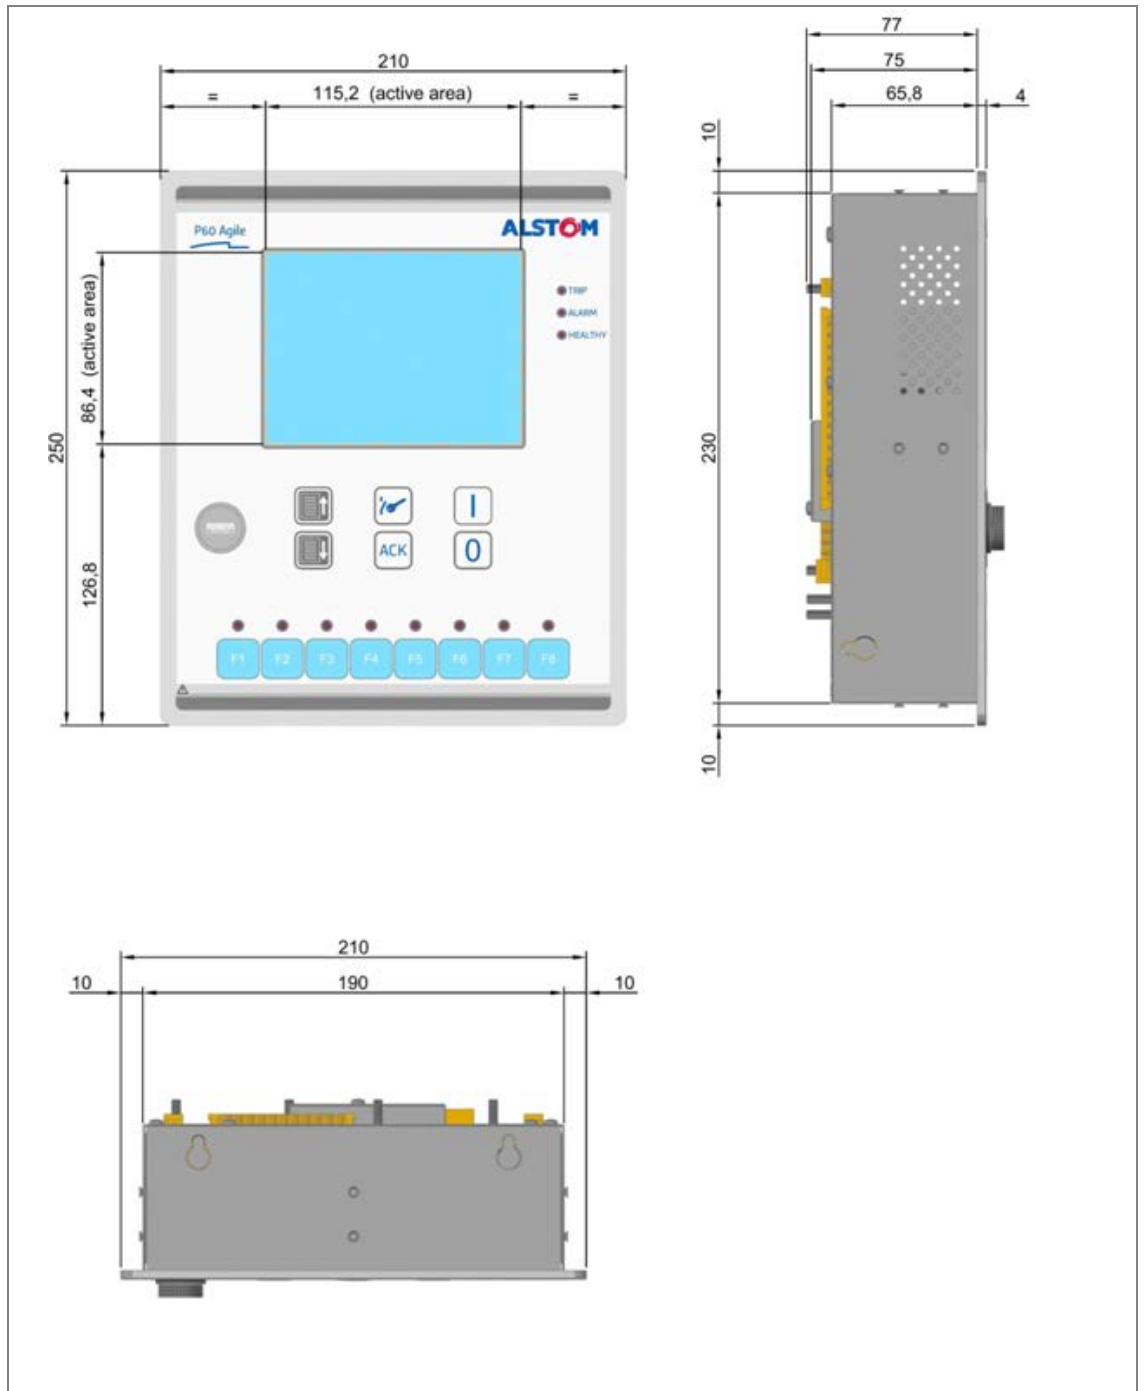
Detailed 3-view-drawing of P60 Agile P16x device
